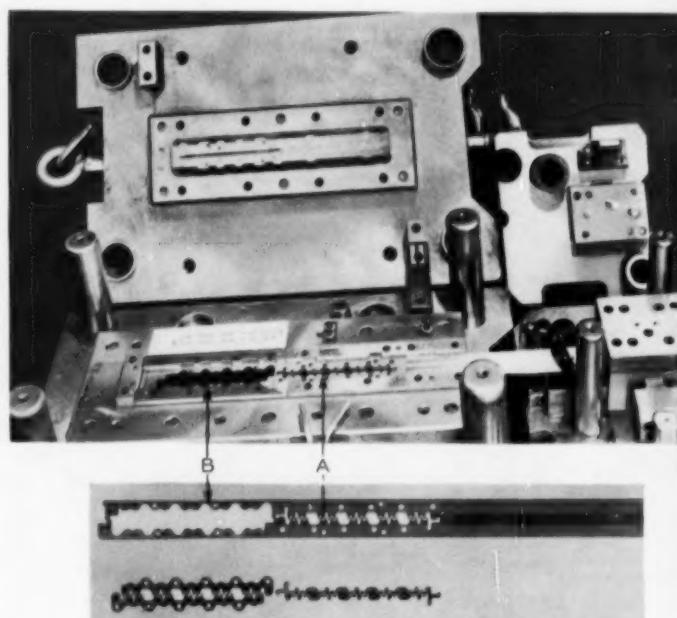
Blanking die for roll-welded multiples. (Shown open to illustrate operations.) At position A, the waste section is punched; at position B, the two finished multiples are punched out and separated. In this way, the contacts are accurately located and, at the same time, the welding is accomplished economically.
